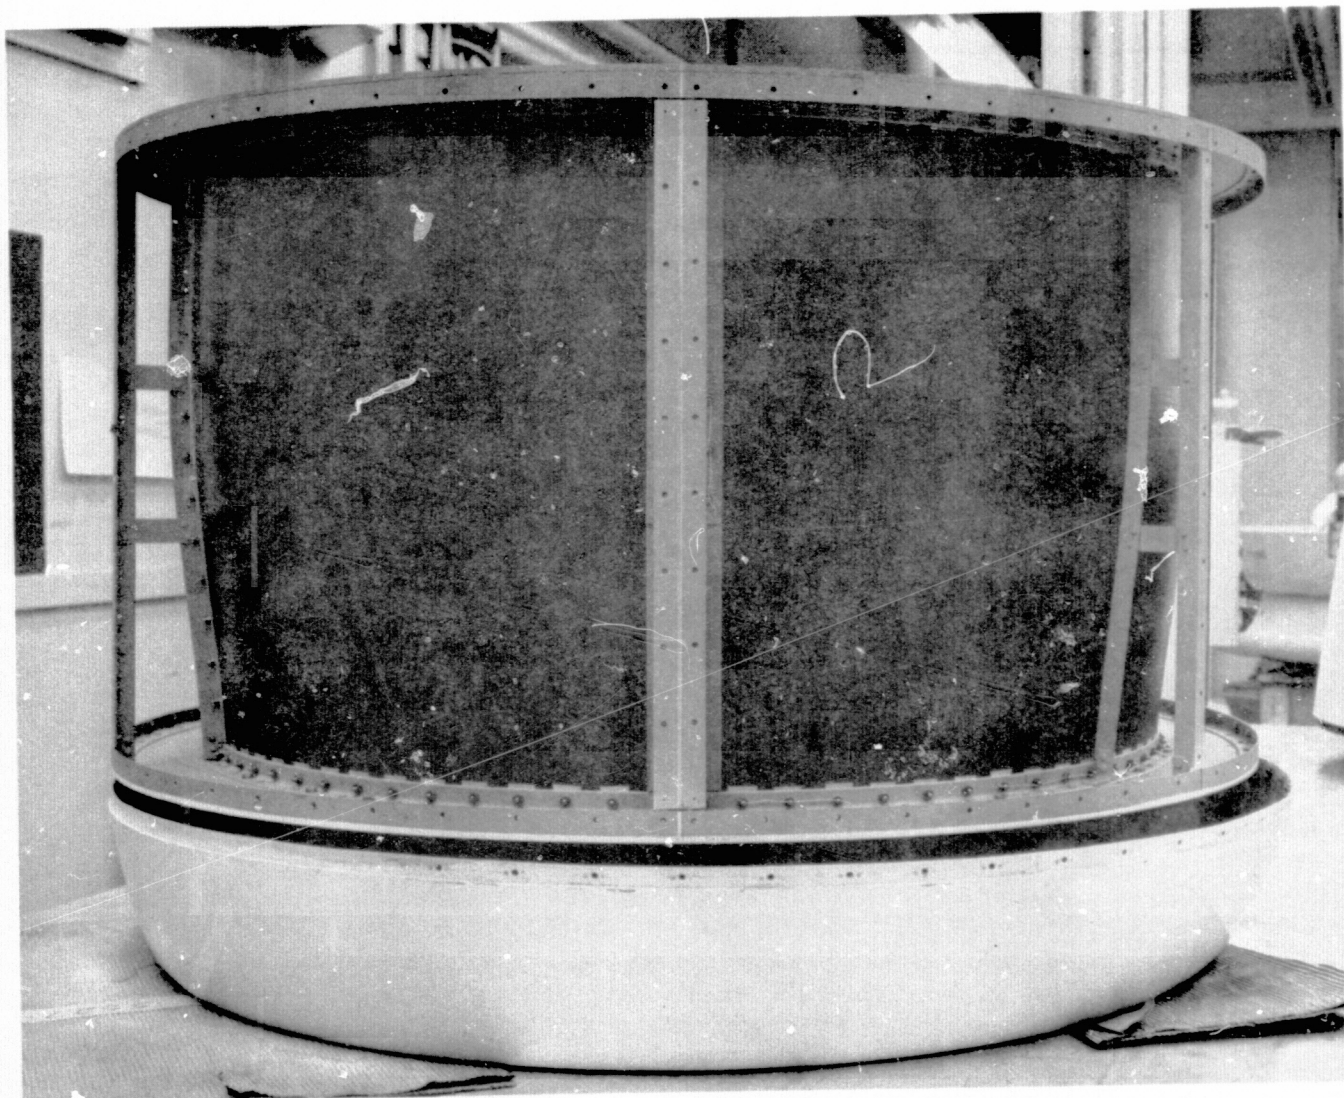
JT8D Refan Side-Engine Inlet Bond Assembly Jig
